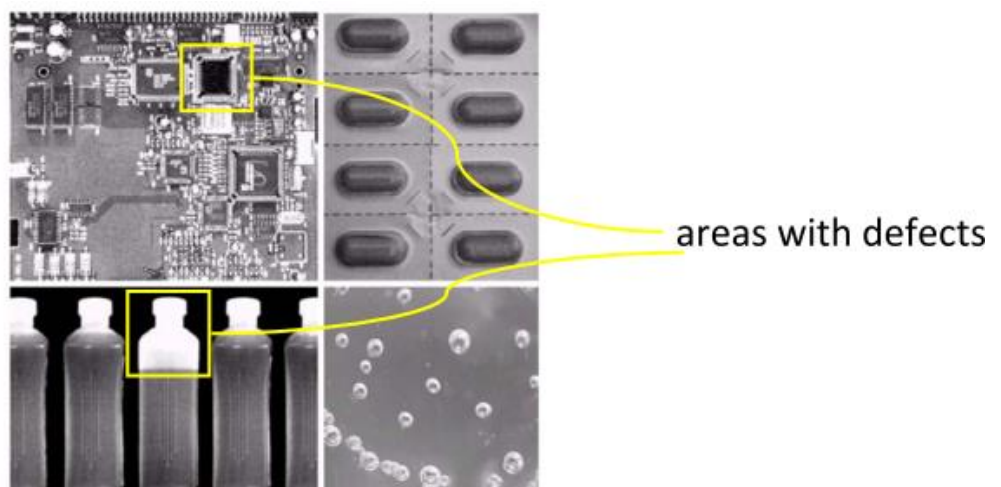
5 : Examples of industrial inspection for defective products (Zhang,2013)
